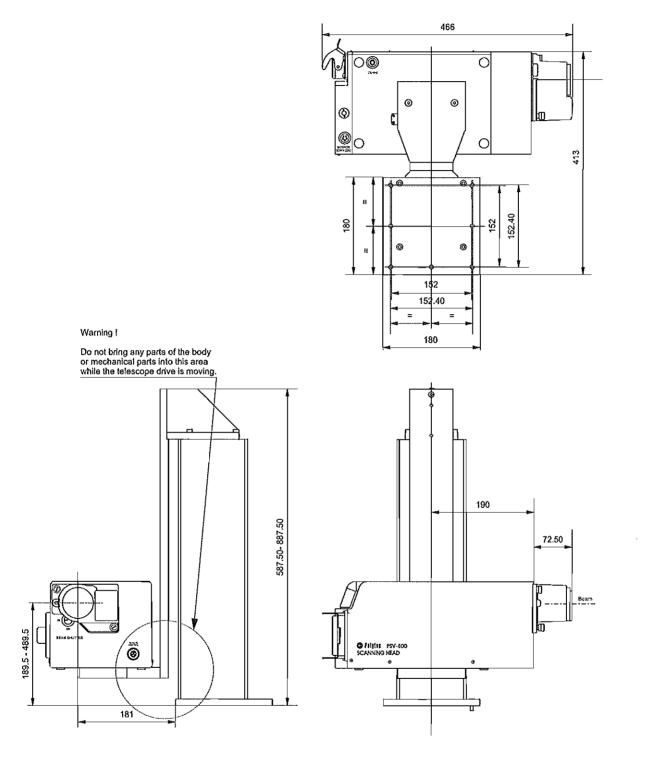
View of the horizontal test stand with scanning head (Dimensions not specified are given in mm)
